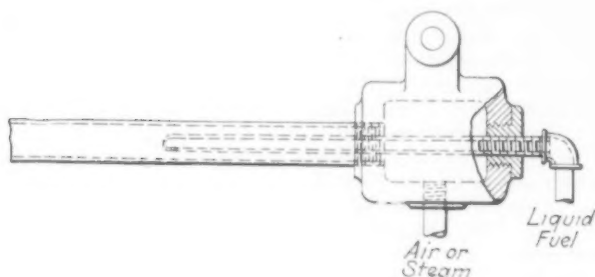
Liquid Fuel Burner for Open-Hearth Furnace
